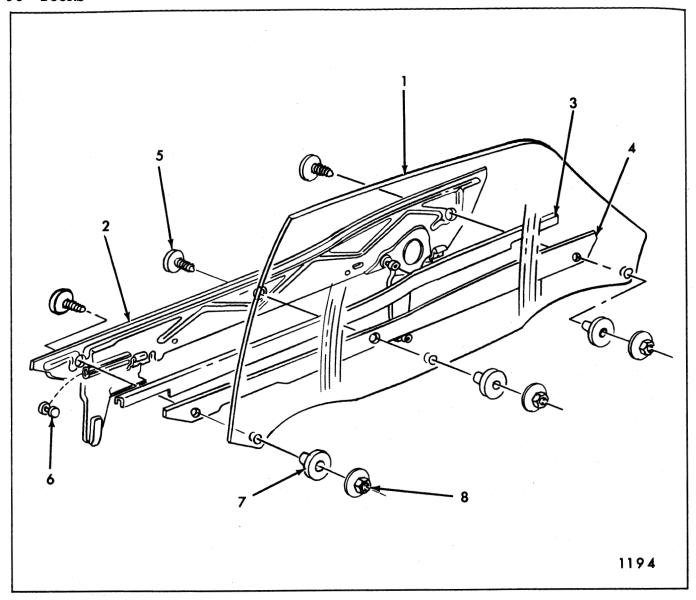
Rear Door Window Assembly "C-69" Styles Except 68069-68169 Styles
